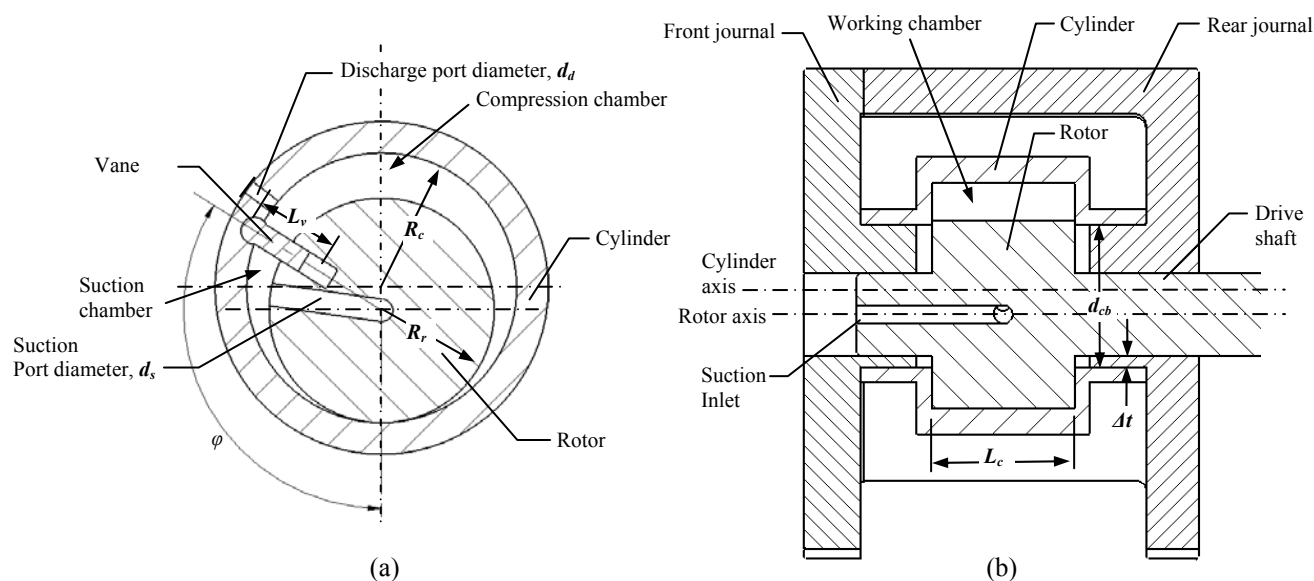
(a) Front sectional view of RV compressor; (b) Side sectional view of RV compressor with journal supports shown
